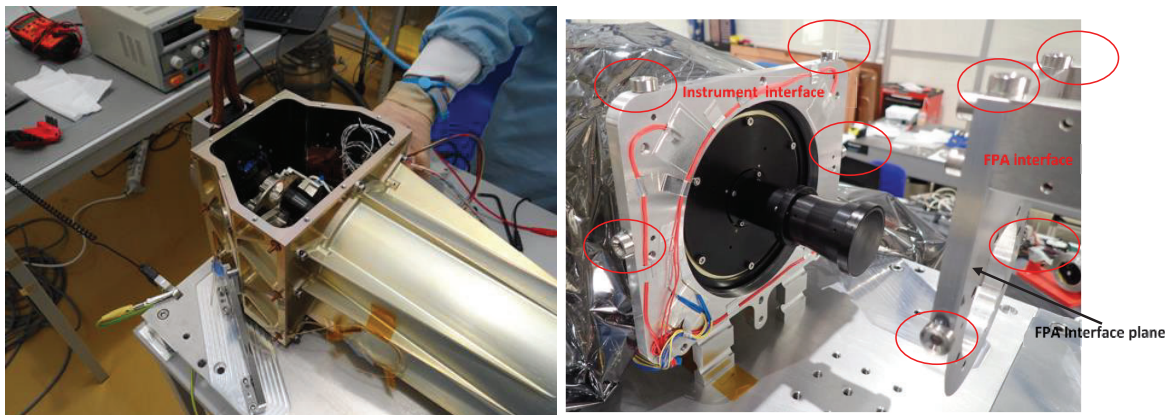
Assembled (left) and dissociated (right) FPA from the equipment box (EQB)
